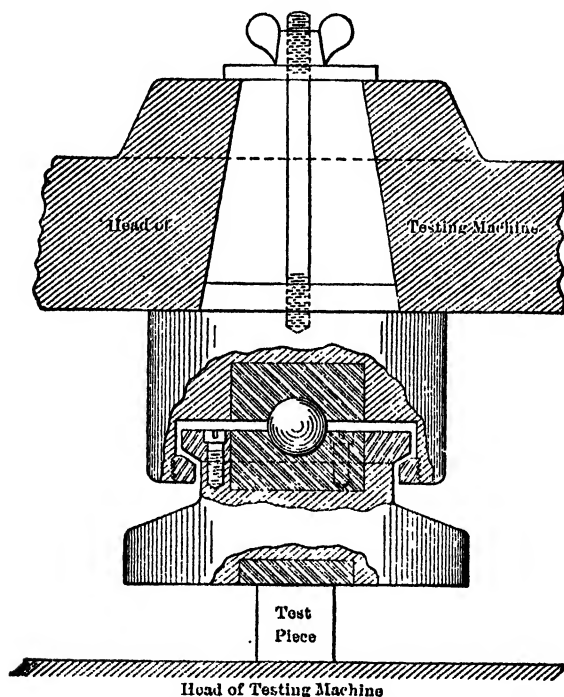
Ball-Bearing Block for Testing Machine. (See p. 78)
